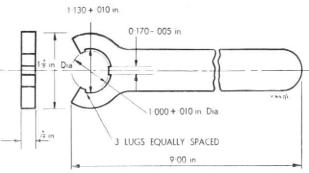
Dimensions for manufacture of a 'C' spanner for removal of burner from holder.
